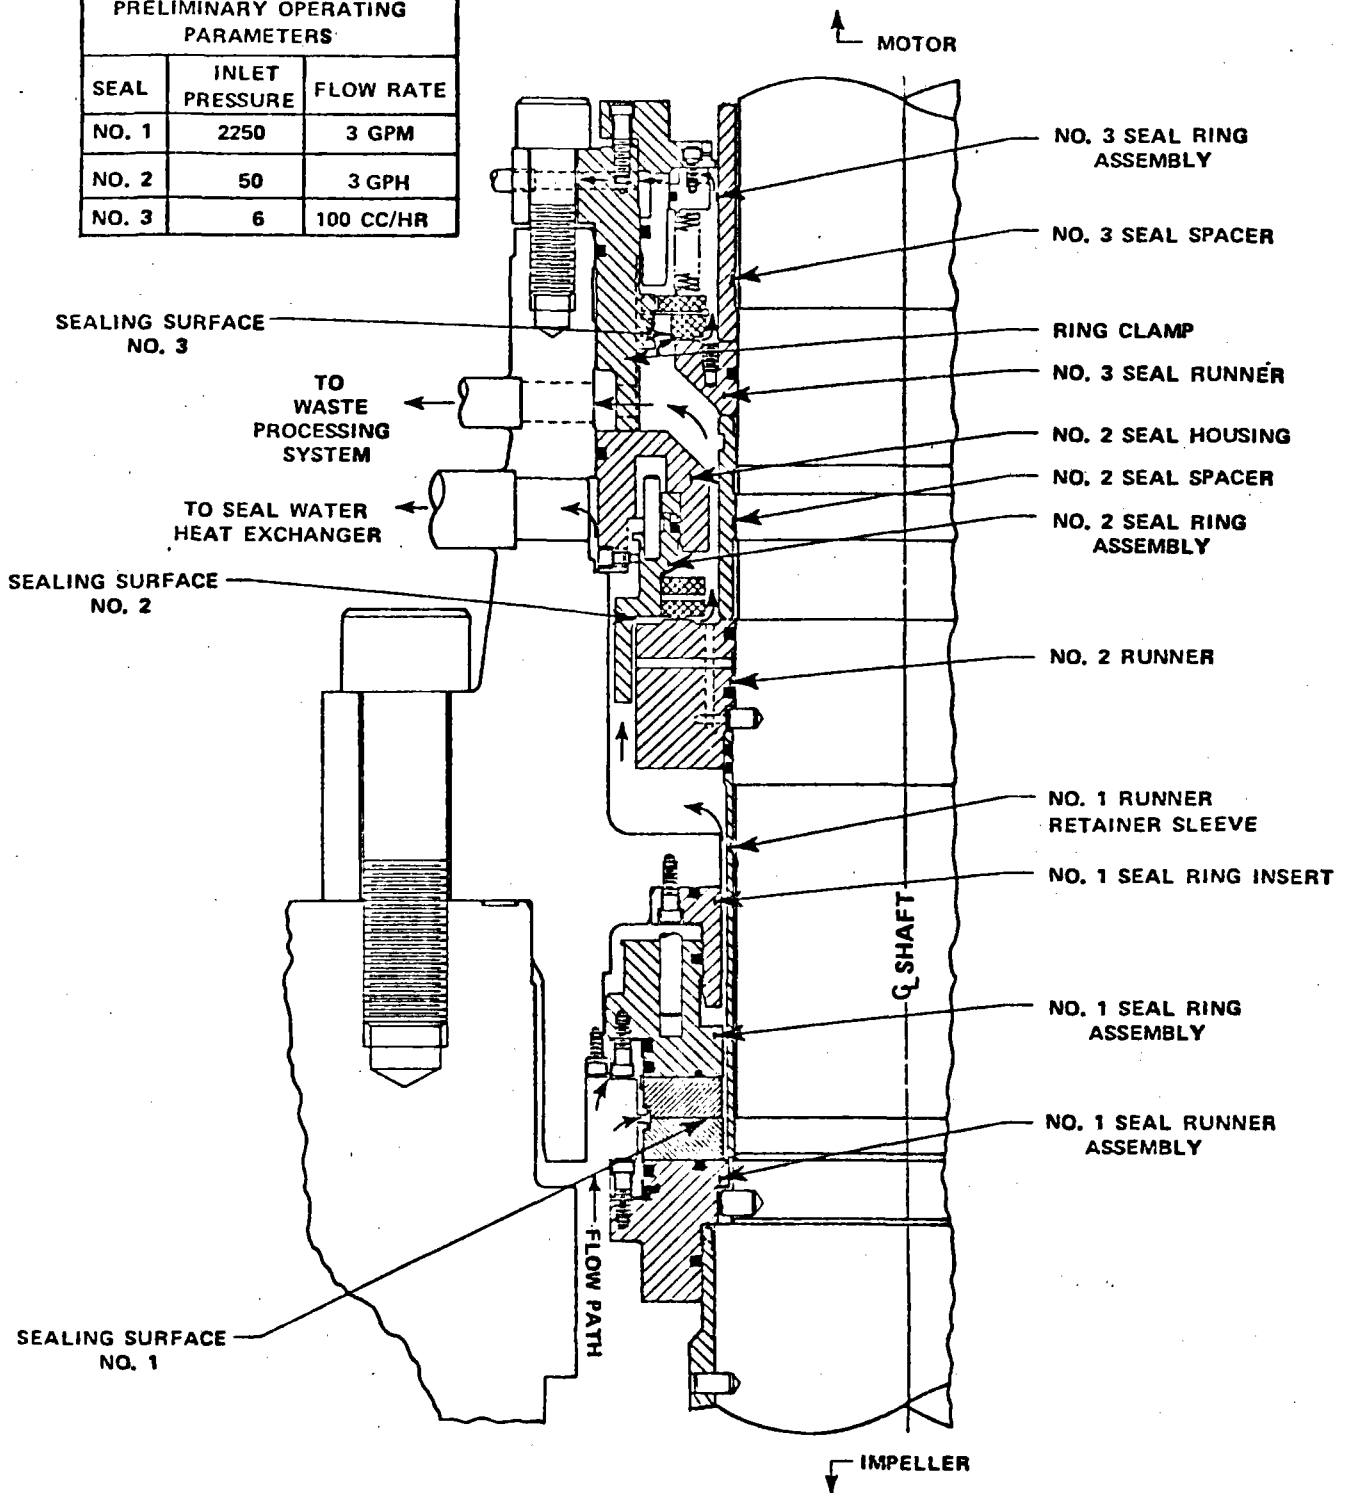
RCP TYPICAL SHAFT SEAL ARRANGEMENT
